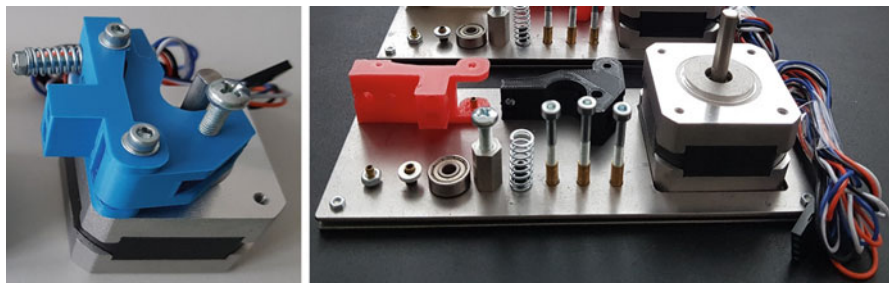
Real assembly (left), all parts positioned in the fixture (right)
